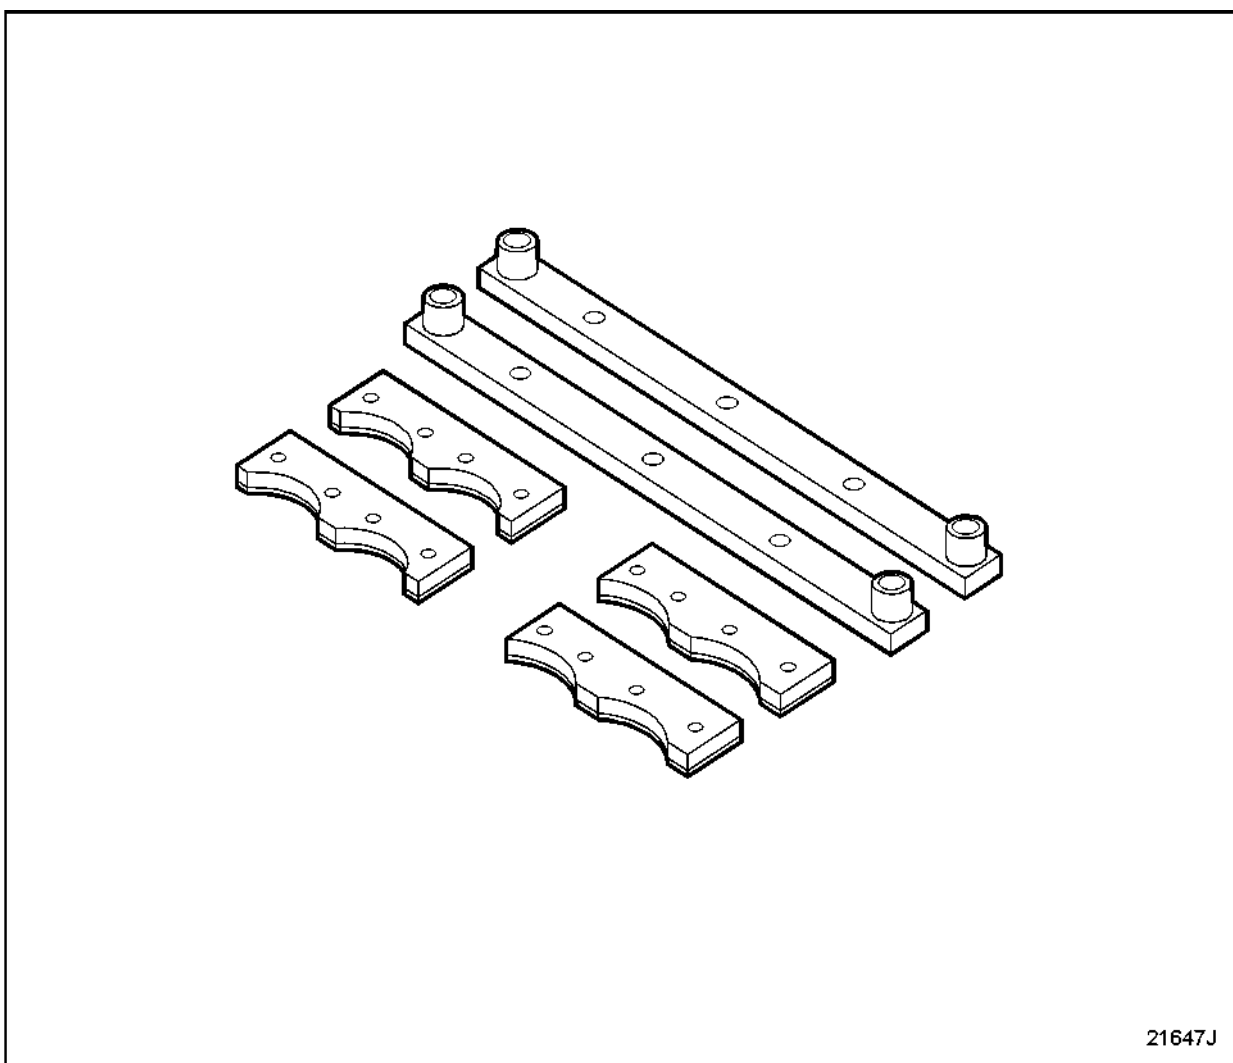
Block And Head Test Pressure Kit,J 39693
